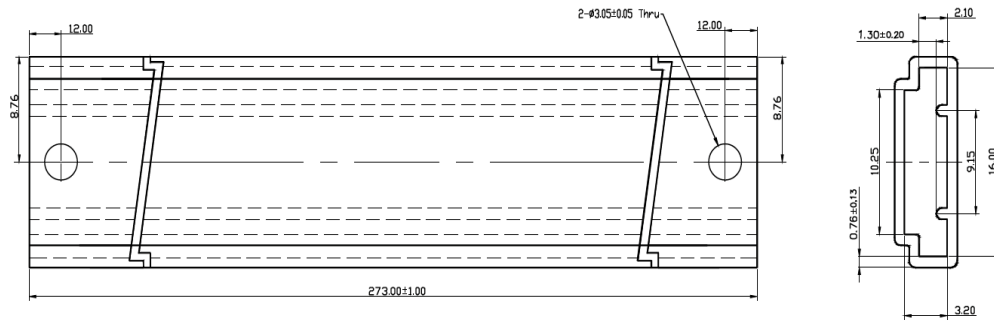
Tube dimensions for L2C5-xxxx1202x060x.
